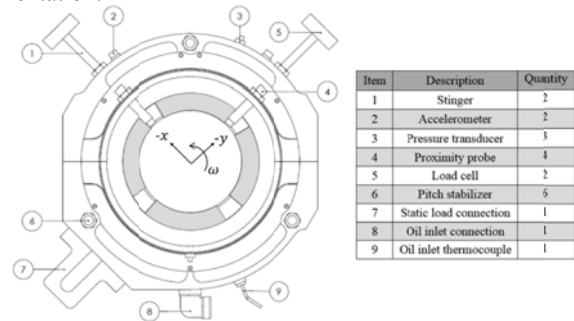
DE view of stator assembly with instrumentation, figure adapted from [9]
